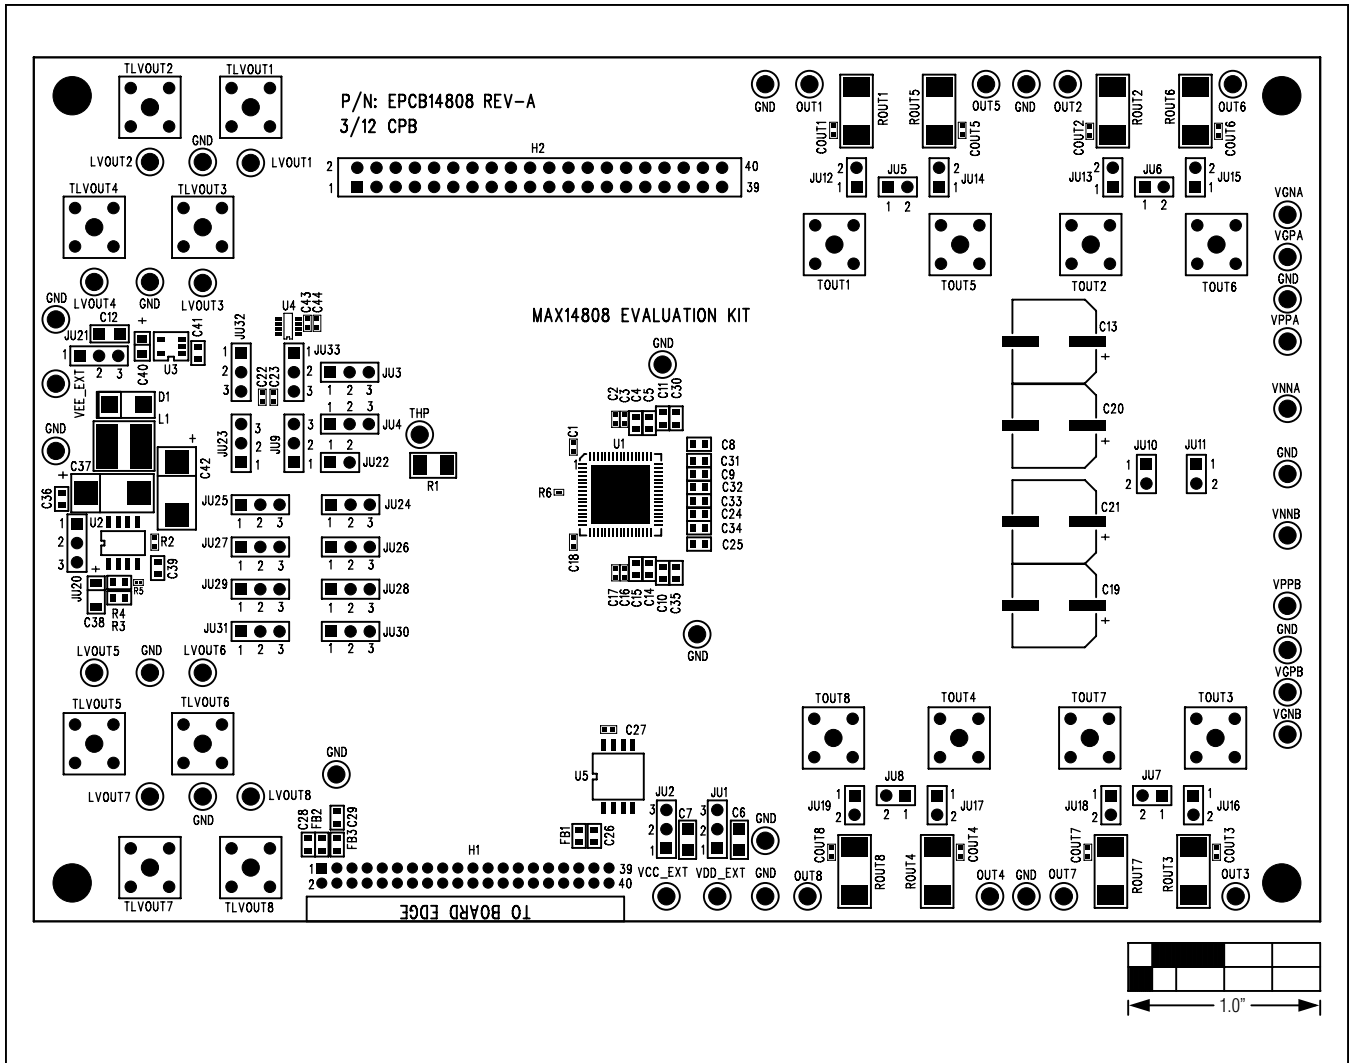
MAX14808 EV Kit Component Placement Guide—Component Side
